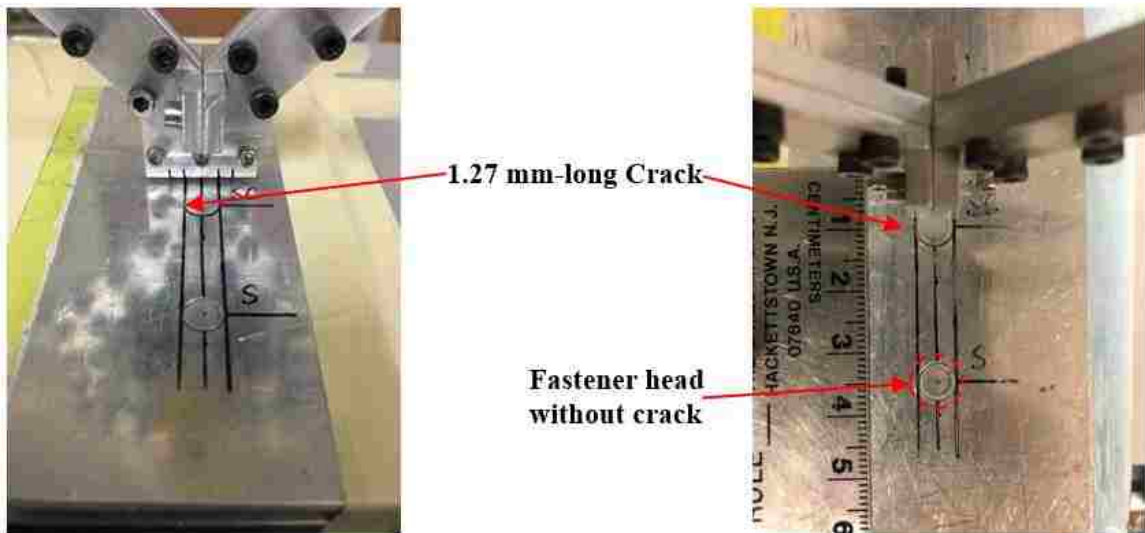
W-band measurement setup for 6.35 mm fastener heads.
